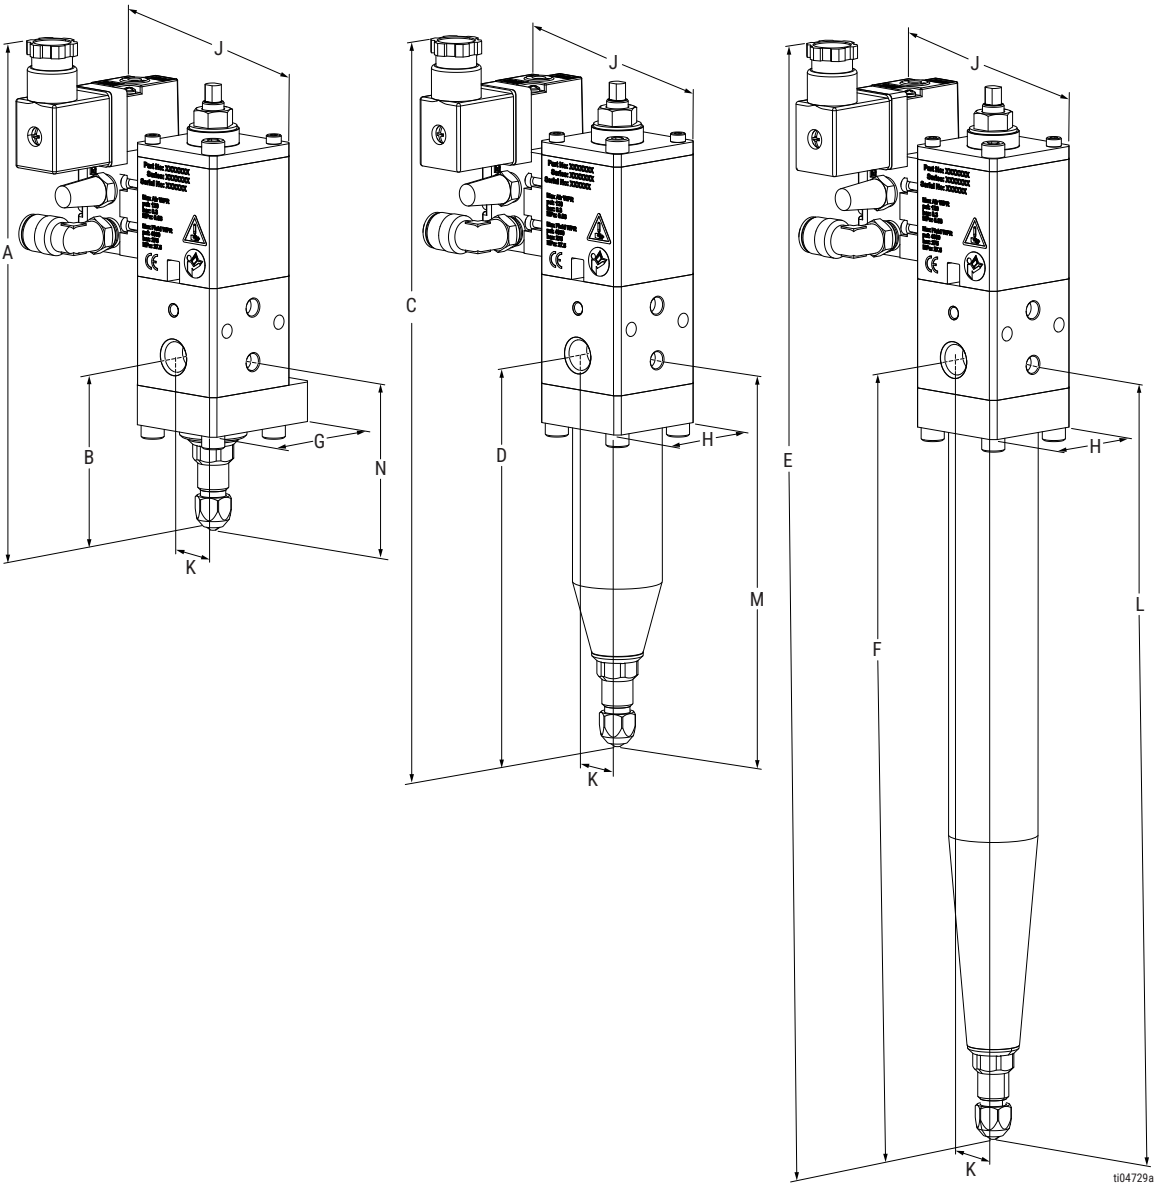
Dimensions for Tip Seal iQ Dispense Valve
